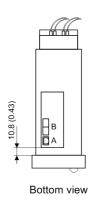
Bottom view of a 7RW80 (housing size <sup>1</sup>/<sub>6</sub>)
